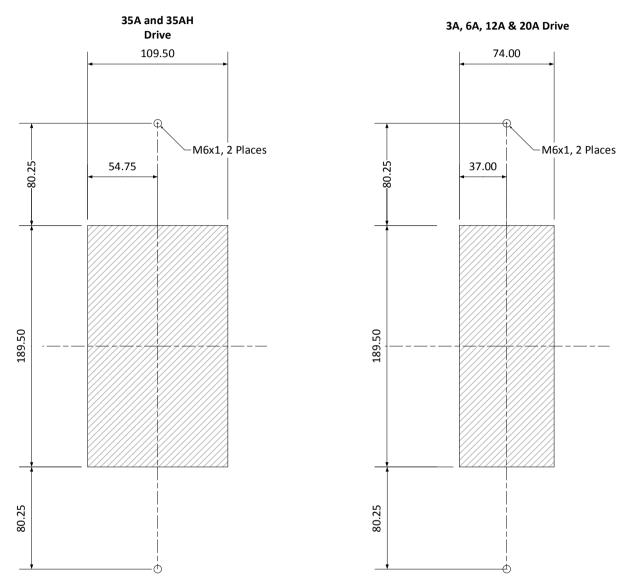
Mounting hole & cut-out specifications for 3A, 6A, 12A, 20A, 35A & 35AH Duct mount Drives
